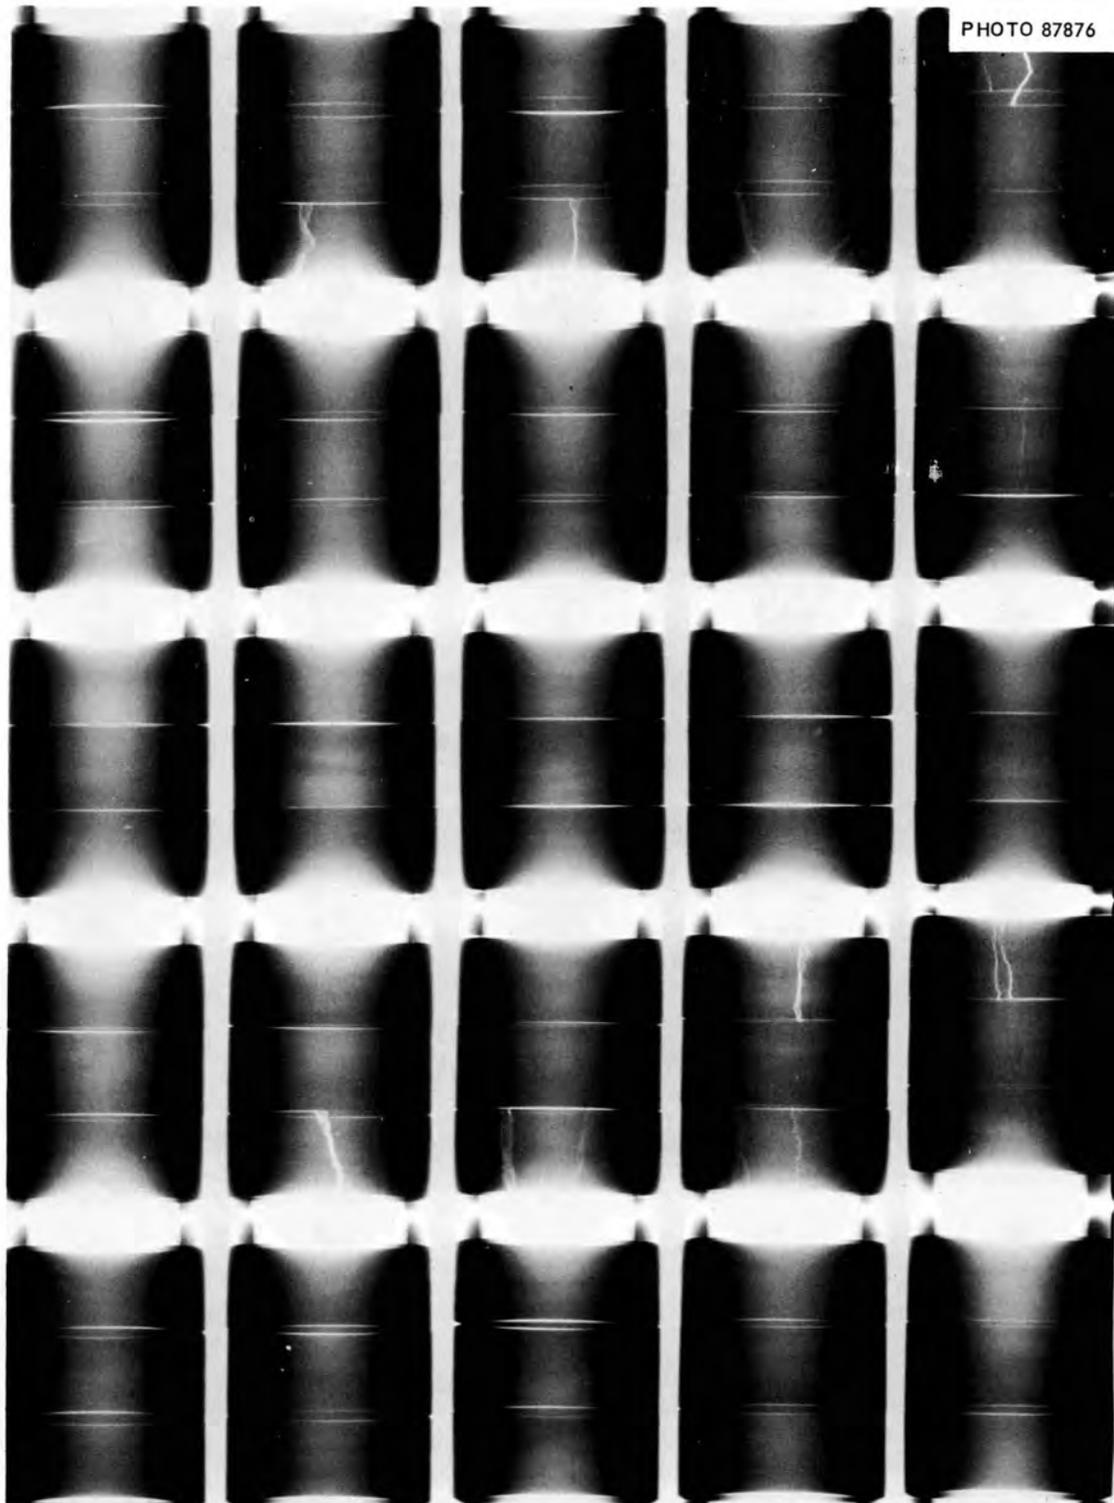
Radiographic of MSRE Control Elements, Showing Cracked Bushings.
